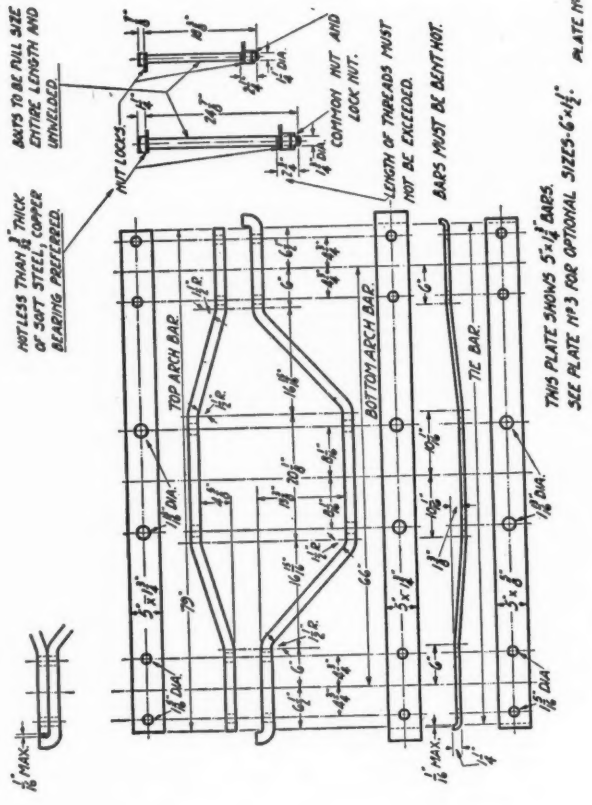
5 in. by 1 3/4 in. arch bars for 50-ton trucks
